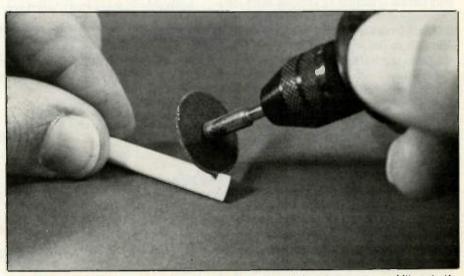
A hand grinding tool makes the job of shaping go fast, but any type of file or knife will do.
